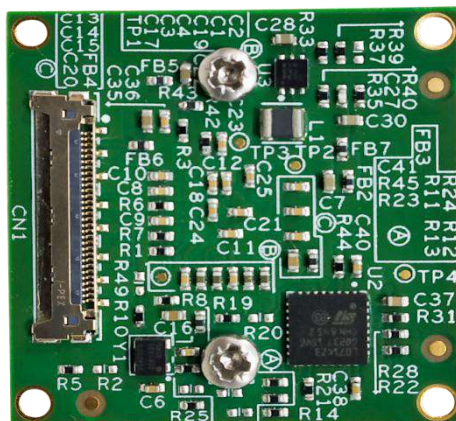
Rear View of e-CAM222\_CUMI2311\_MOD Board
